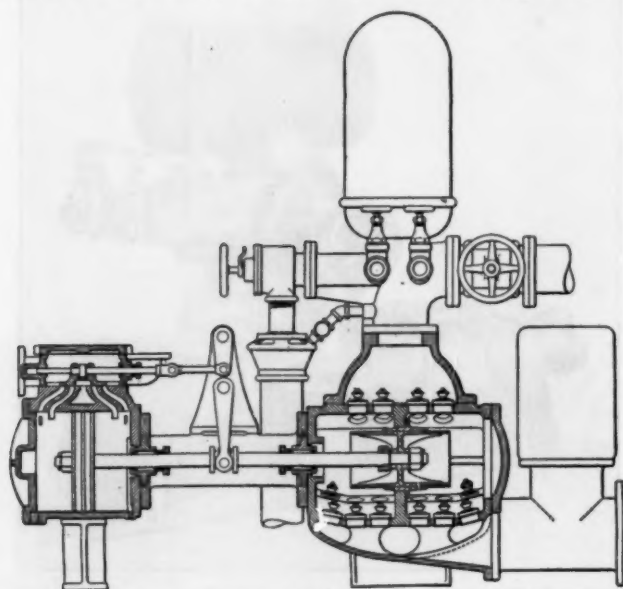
SECTIONAL VIEW OF UNDERWRITER STEAM FIRE PUMP
